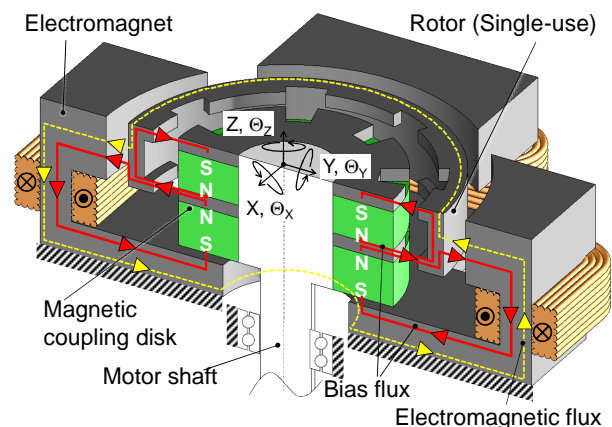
Configuration of the magnetic bearing and torque transmission mechanism
